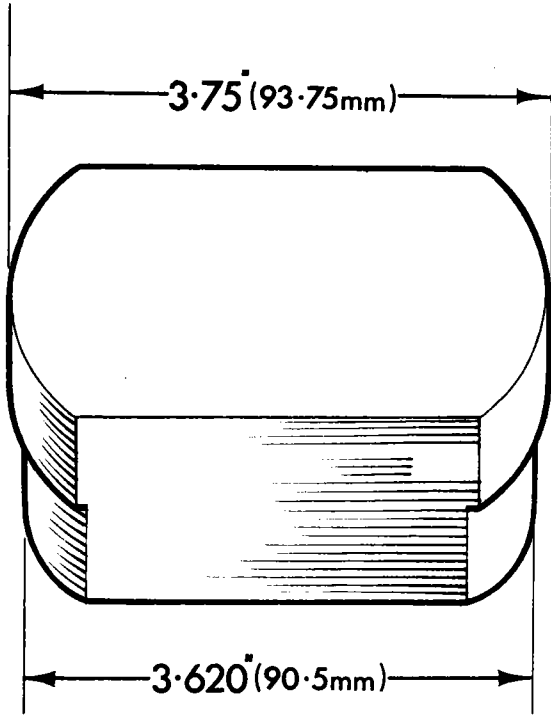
Pressing out a cylinder liner using a stepped block
